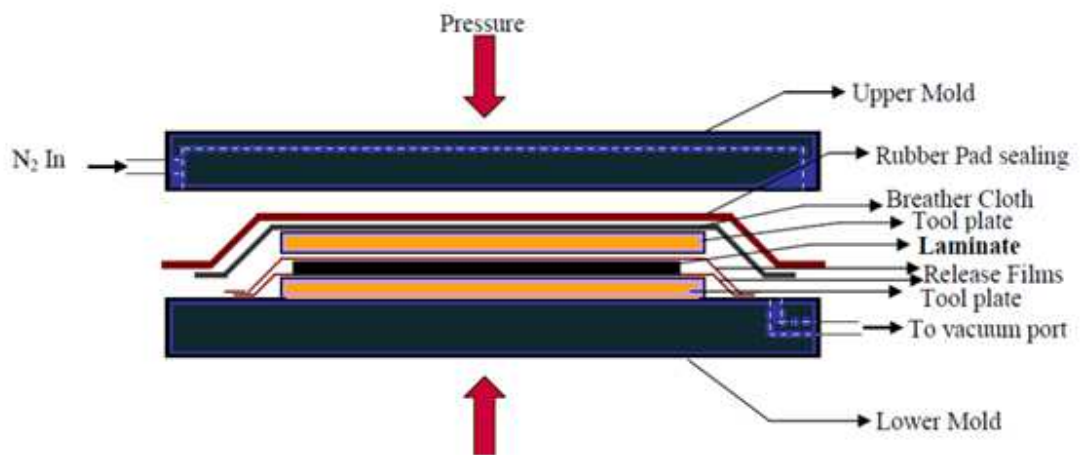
Schematic of the mold assembly for simulated autoclave curing of the composite panels
